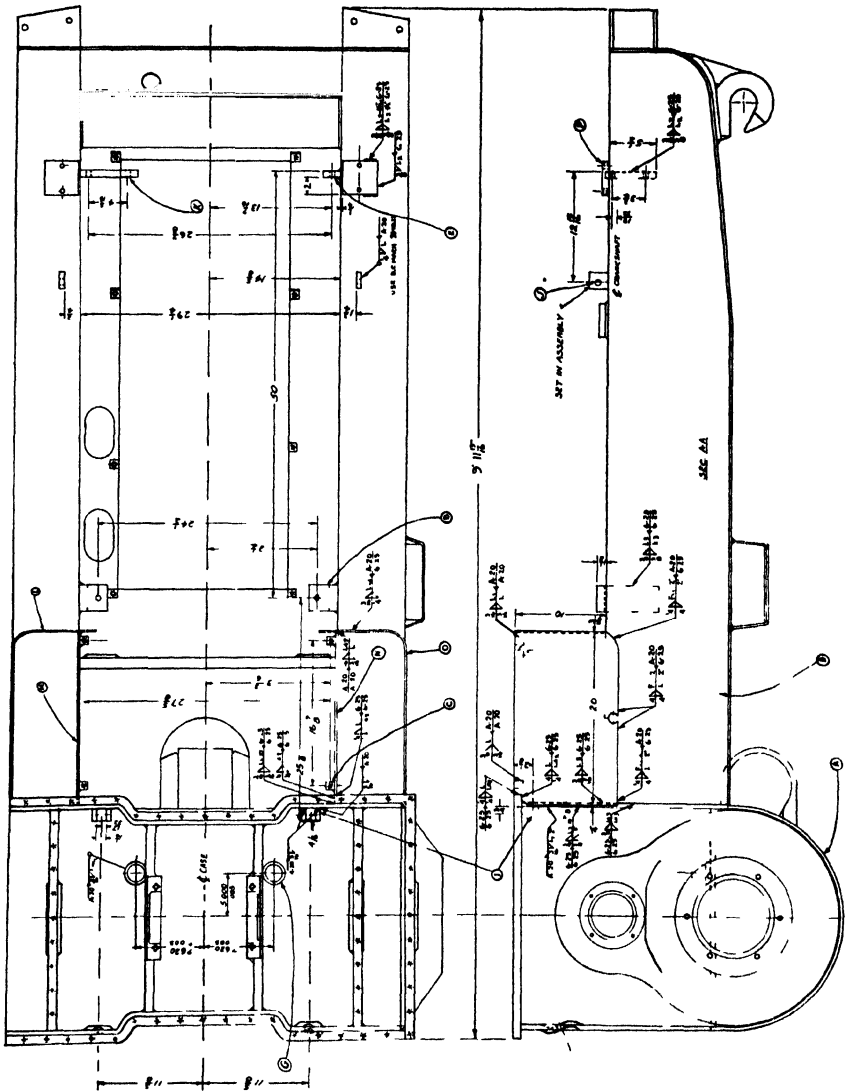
Shop print for welding fuel tank and frame structure to the transmission case.
